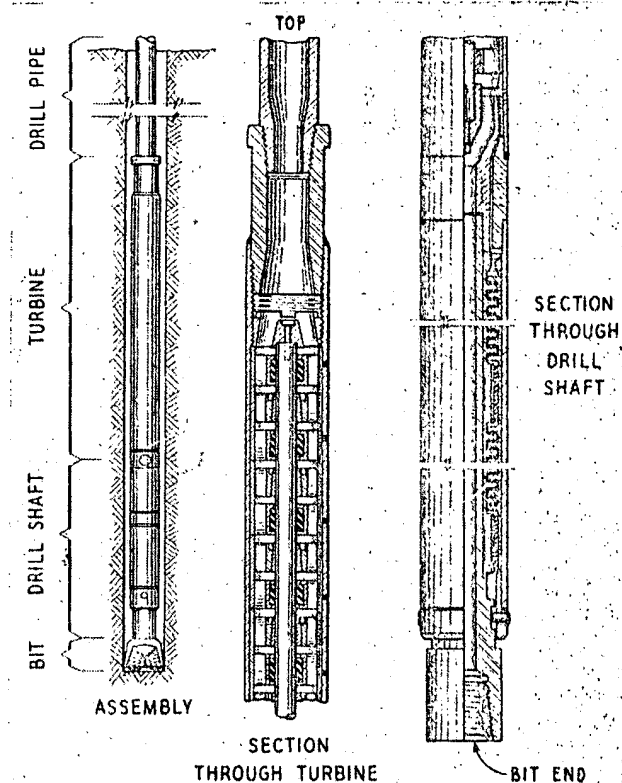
The Standard Oil Company of California turbodrill of 1945 with multi-step rubber thrust bearings.
